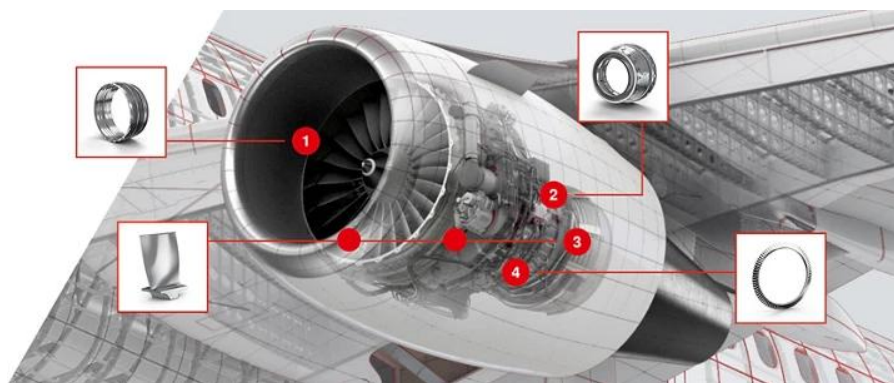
Aircraft engine parts: 1-Fan case; 2- Combustion case; 3-Turbine blade; 4- Blisk
